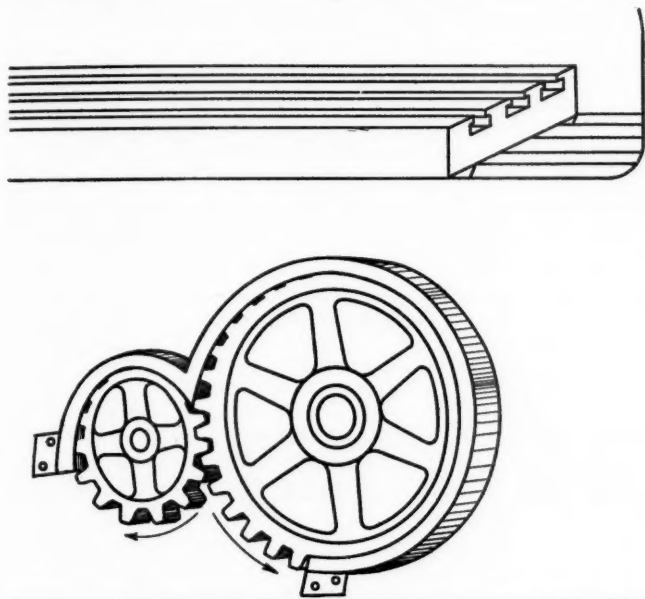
Proper Form of Rim Guard for Gear Wheels.
